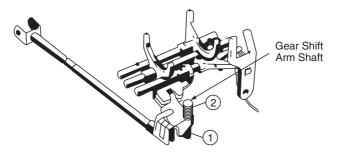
Checking of Gear Shift Control Shaft Bushes for Wear (Courtesy: Maruti Udyog Ltd.)
